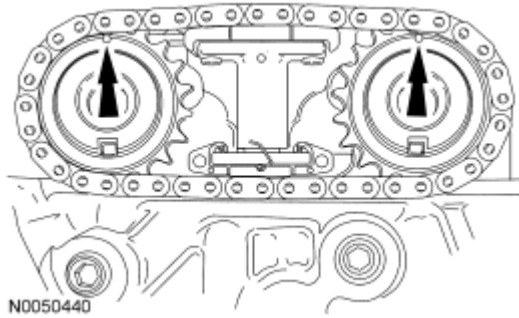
Identifying Timing Marks At 12 O'clock Position
